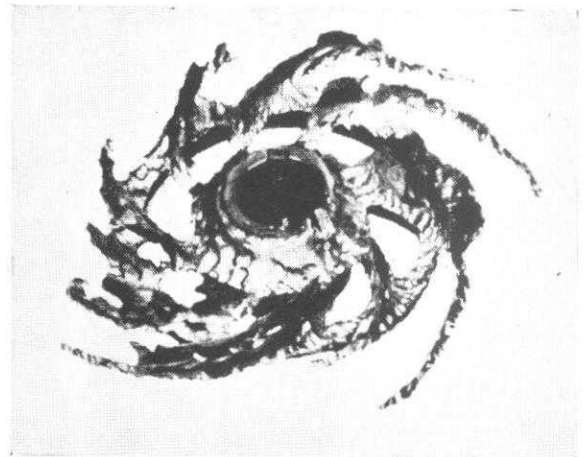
Remains of Stainless Steel Pump Impeller, Ruined by Erosion-Corrosion
